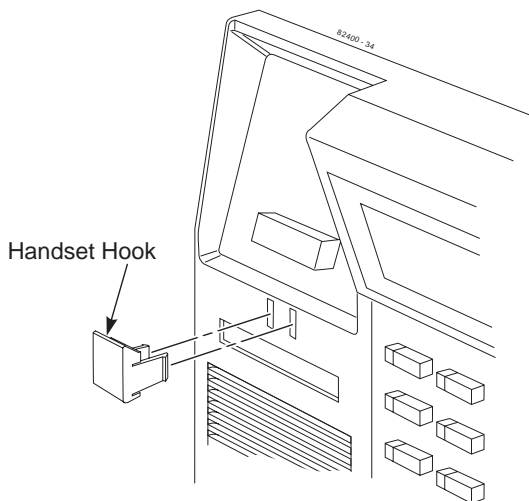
INSTALLING THE WALL-MOUNT HANGER
